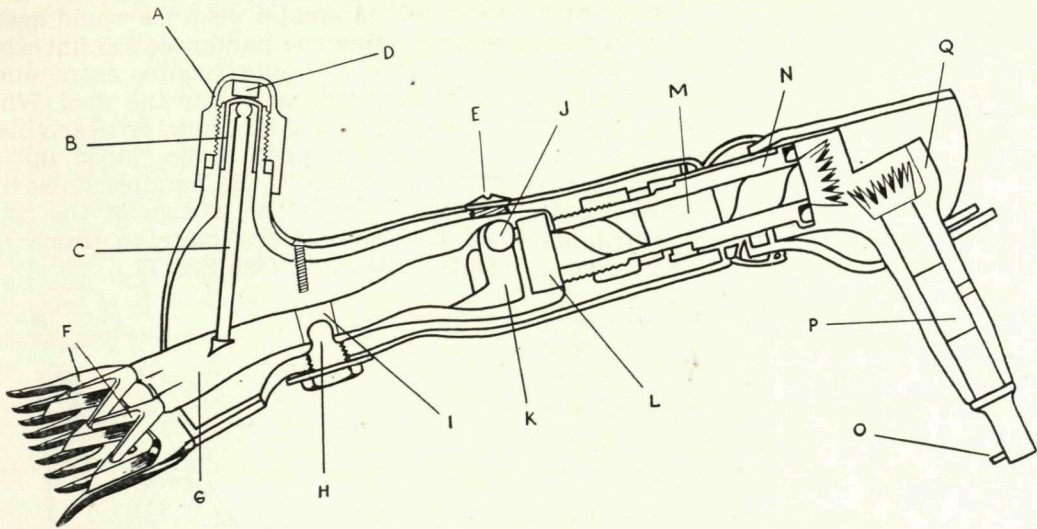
Shearing Handpiece—(A) Tension nut; (B) Tension sleeve; (C) Tension pin; (D) Crown plate; (E) Inspection screw; (F) Fork yokes; (G) Fork; (H) Post; (I) Fulcrum; (J) Ball; (K) Ball race; (L) Crank head; (M) Main spindle; (N) Bush; (O) Spindle pin; (P) Back spindle; (Q) Back joint
